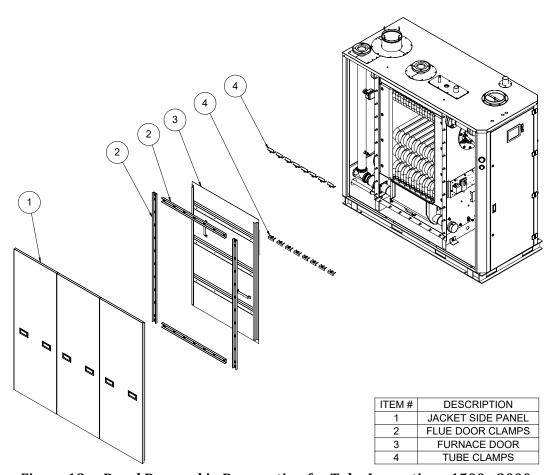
Panel Removal in Preparation for Tube Inspection - 1500 - 3000
